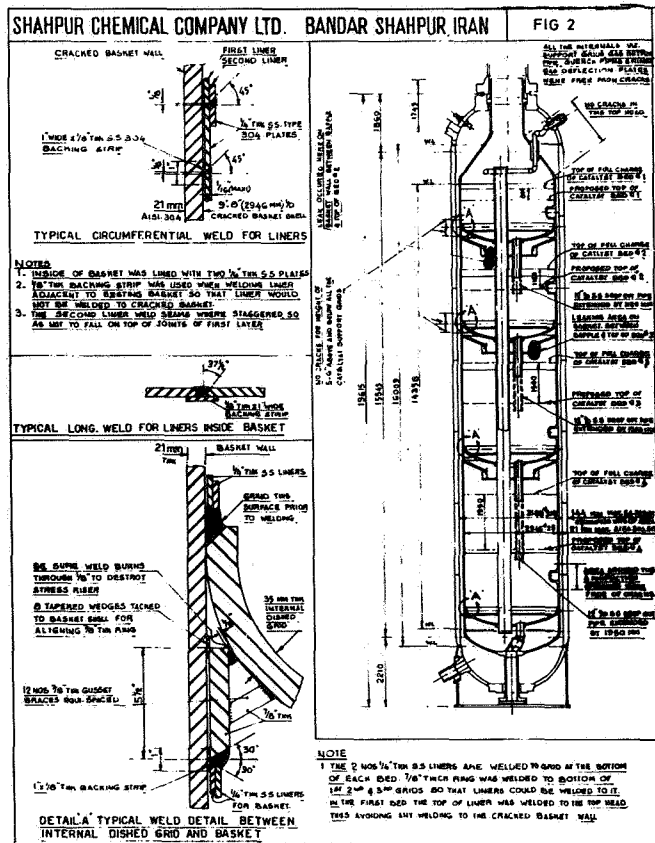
Details of the internal basket, showing cracks and welds.
